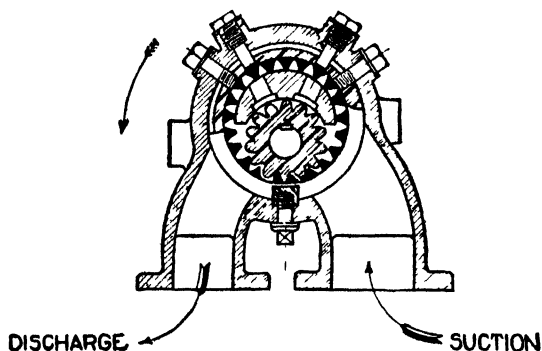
Electrically Driven Auxiliary Oil Pump
